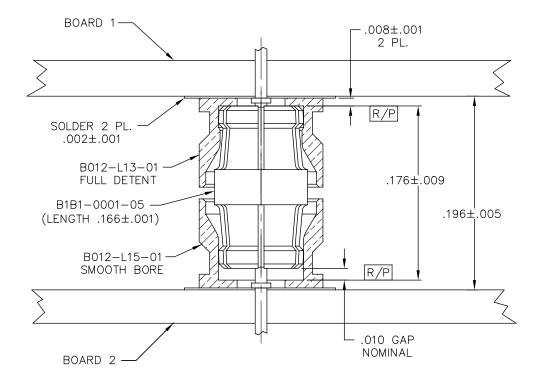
GPPO Minimum Board-to-Board Tolerance Analysis
